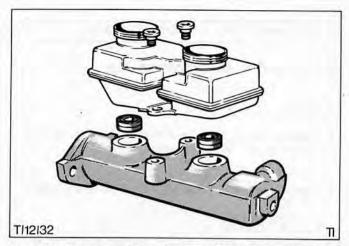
Remove reservoir and cylinder to reservoir fluid seals.
